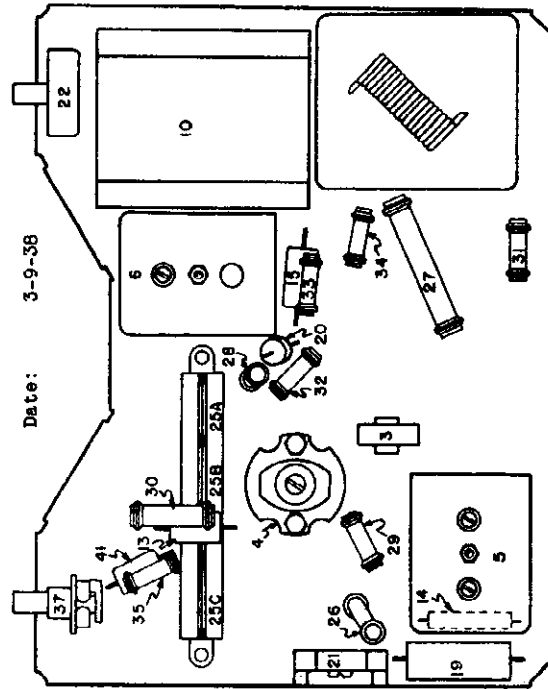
PARTS LAYOUT--BOTTOM VIEW
